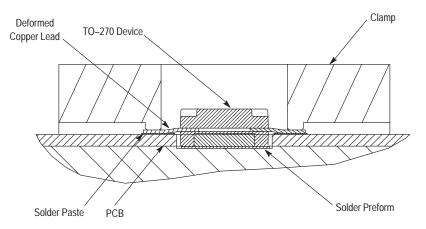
Fixture in Screwed Down Position with Leads Deformed
